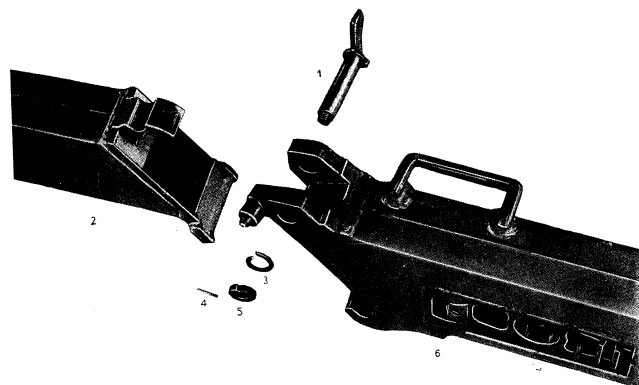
FRONT AND REAR CARRIAGE TRAIL CONNECTING BOLT — DIS-
